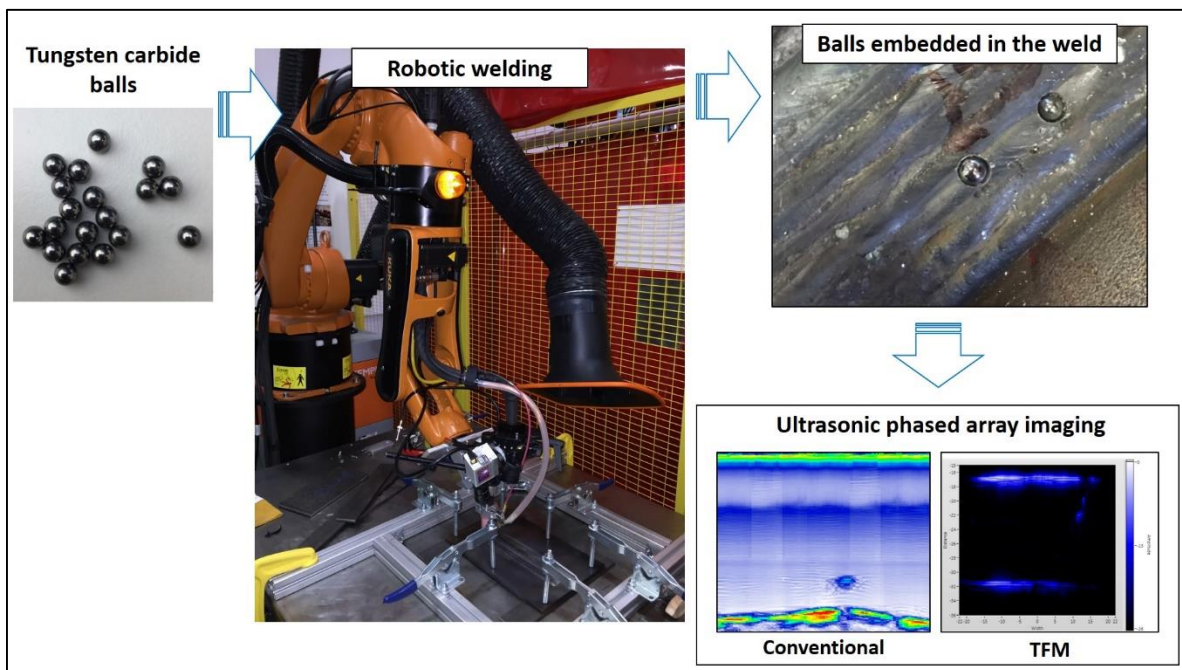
The intentional weld defect process from manufacturing by robotic welding machine to inspection using TFM phased array
